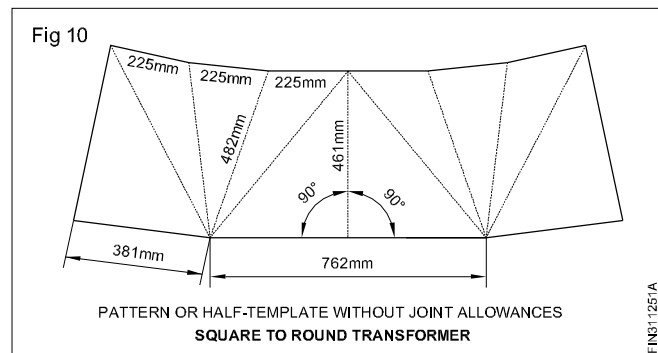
shows a scale development pattern on which are marked the full size dimensions. This type of drawings are supplied by the drawing office for marking out purposes. Allowances for the seams and the joints must be added to the layout.
